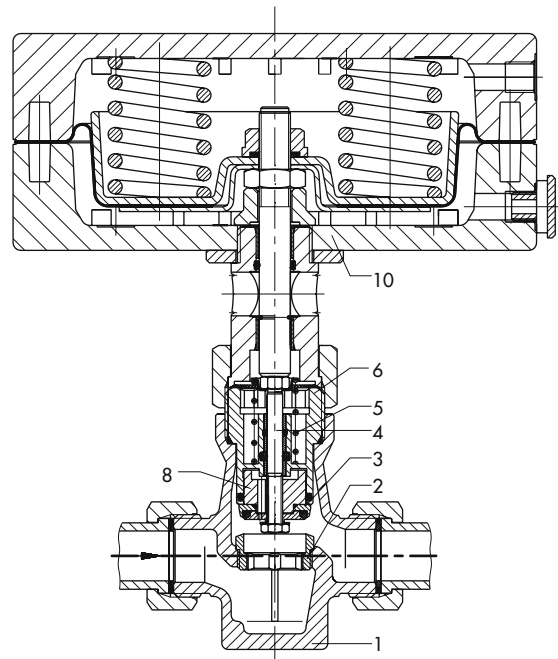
· Type 3222/2780-1 Pneumatic Control Valve, version for temperatures up to 300 °F (150 °C) with balancing piston
